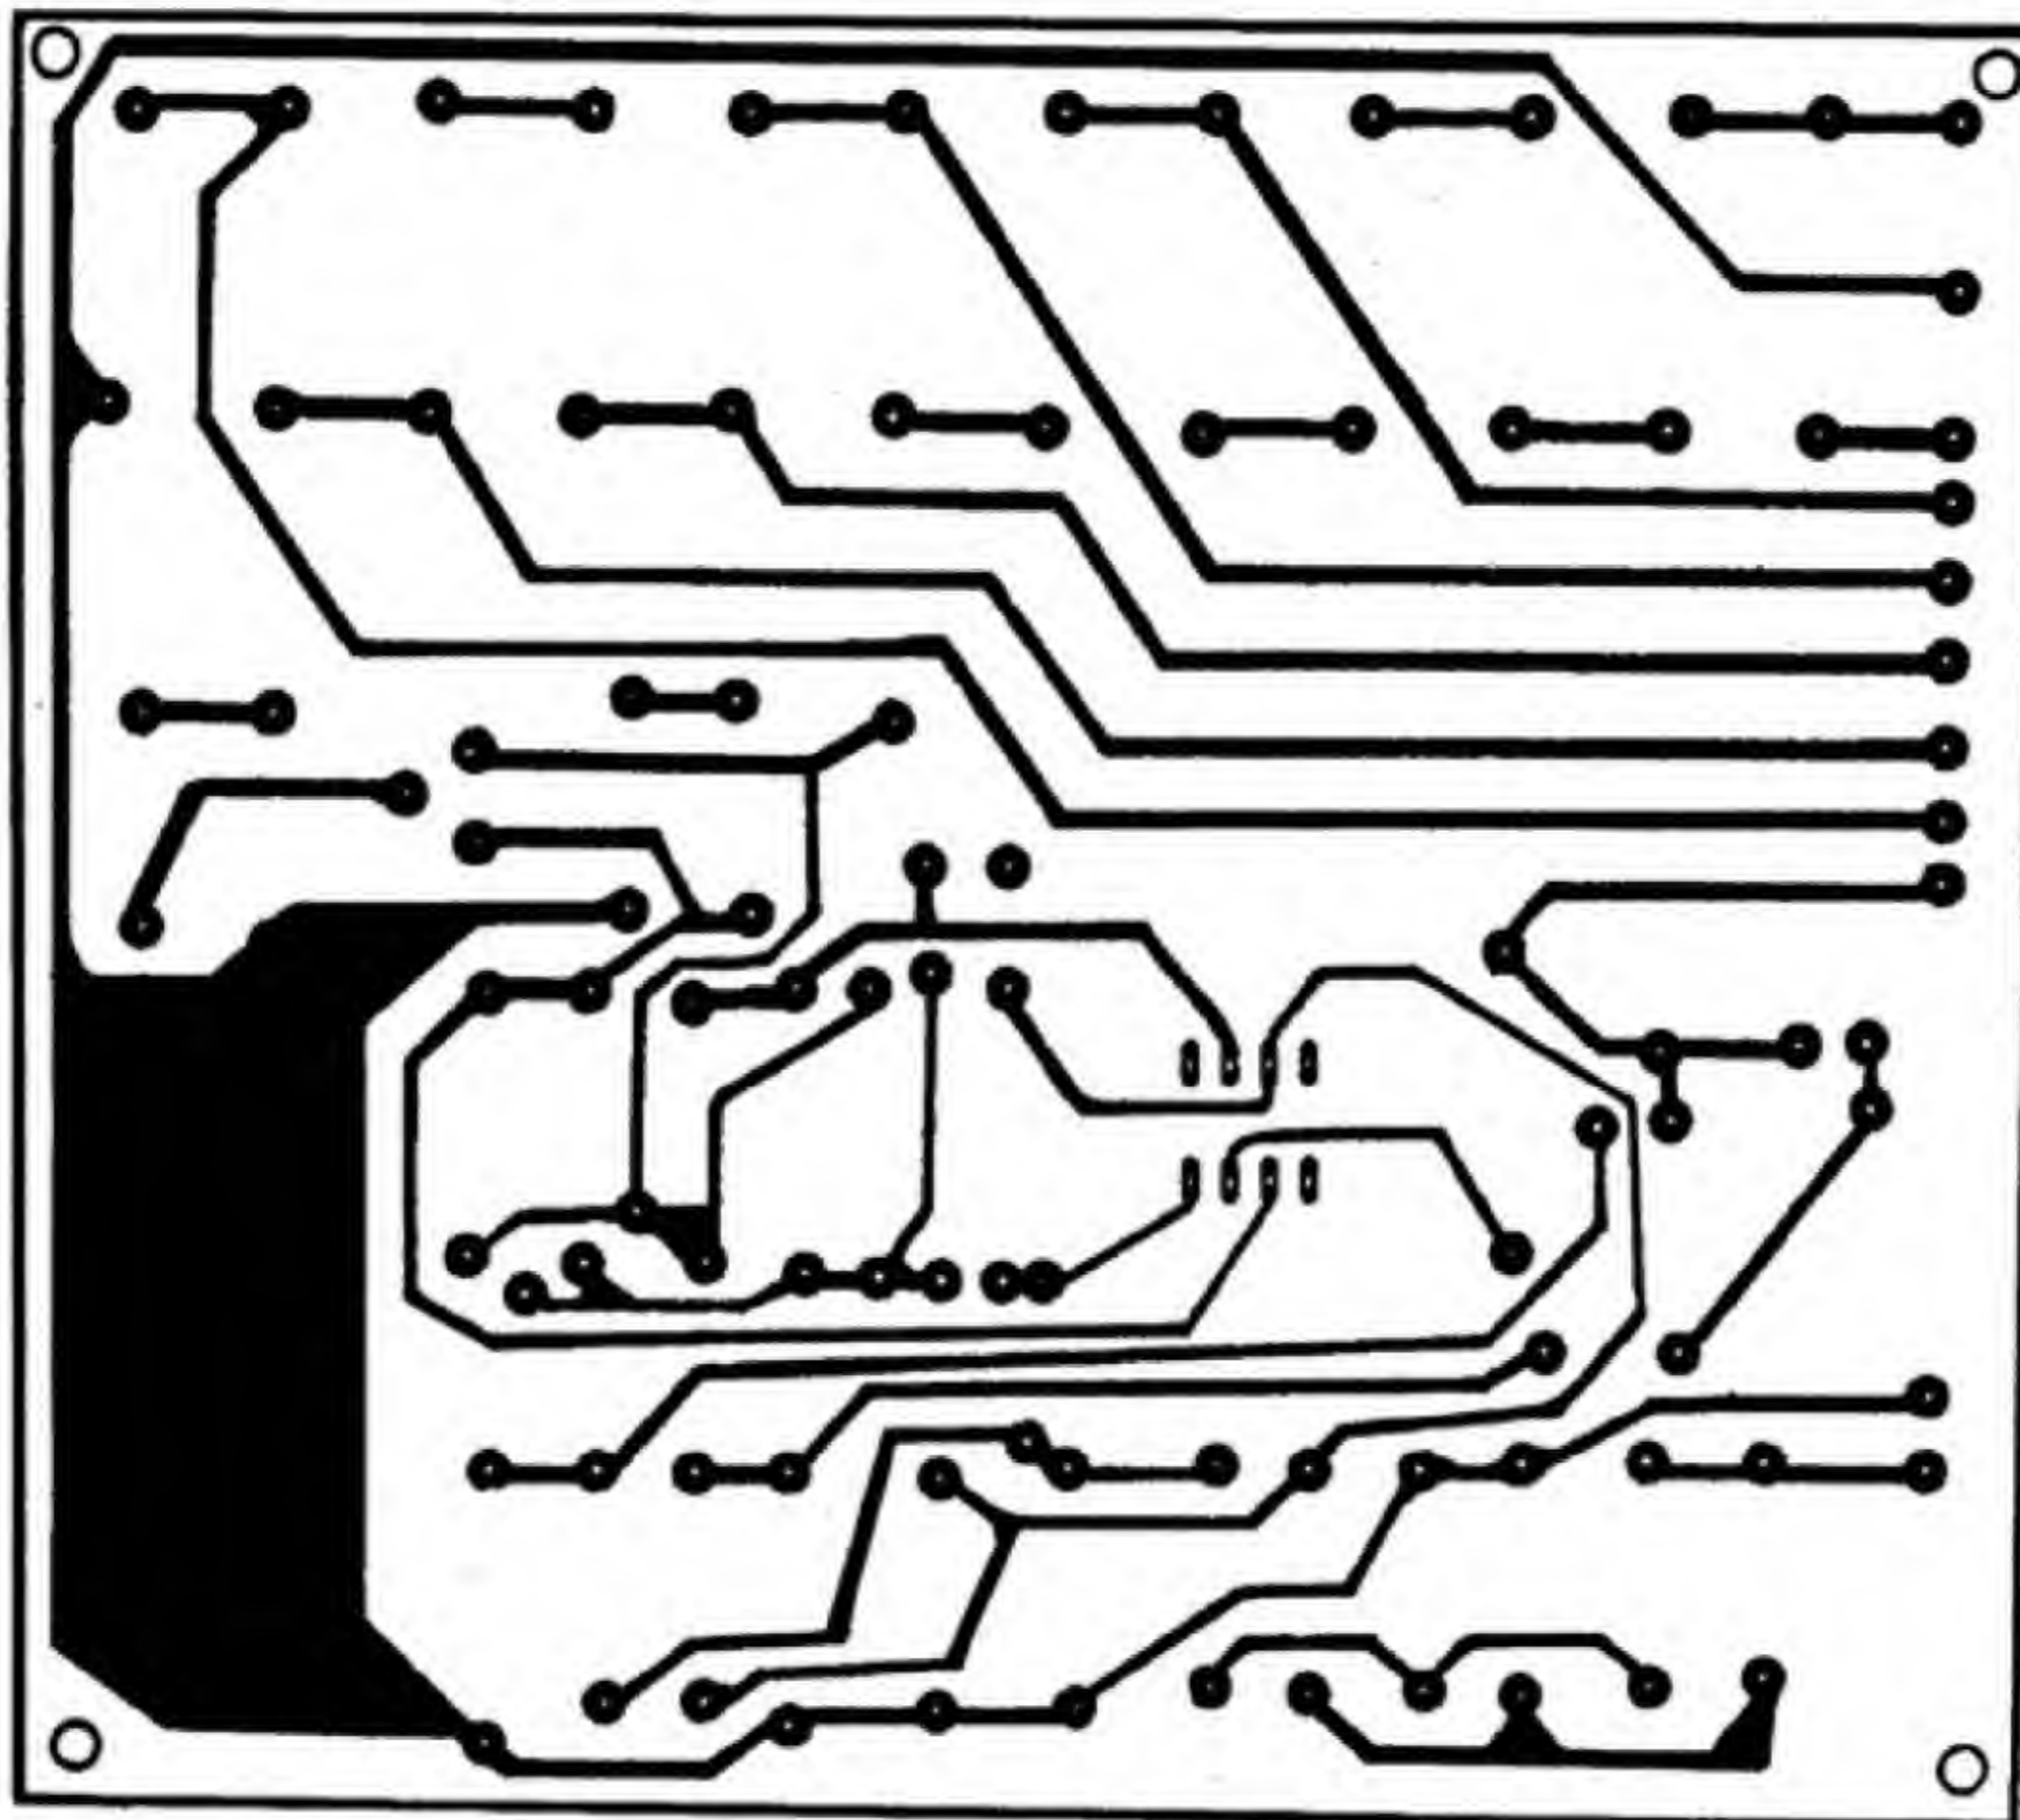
Actual-size PCB layout for the high impedance adapter.
